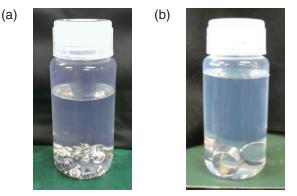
The example of oil extraction of parts (a) and the cut parts (b)
